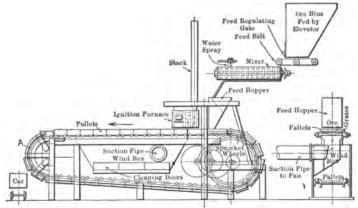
Dwight-Lloyd Straight-line Lead Ore Sintering Machine.
